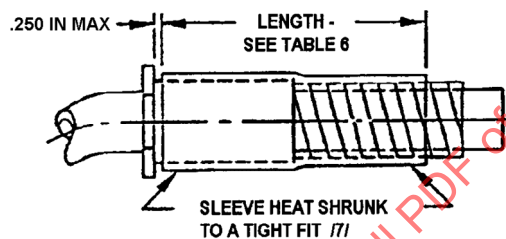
ABRASION SLEEVE ATTACHMENT
